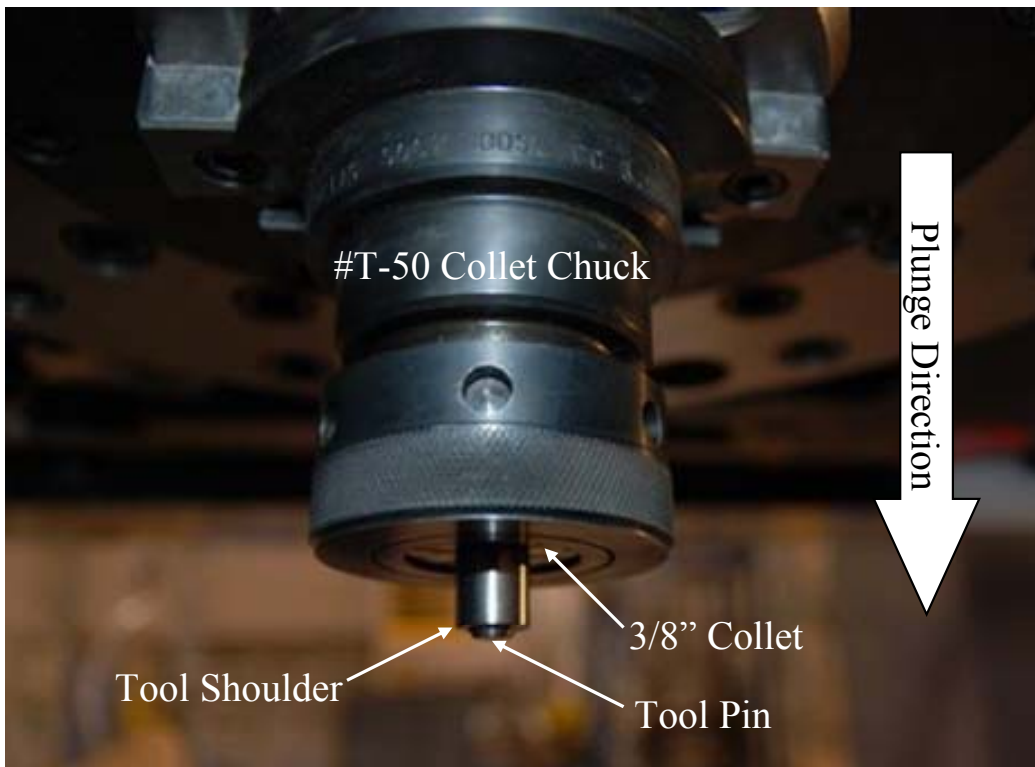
Friction stir welding tool loaded into a #50 collet chuck tool holder.
